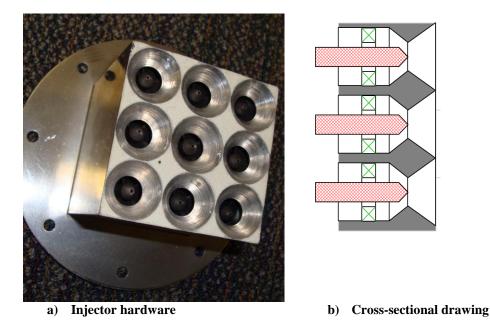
9-point injector configuration a) injector hardware, and b) cross-sectional drawing.
